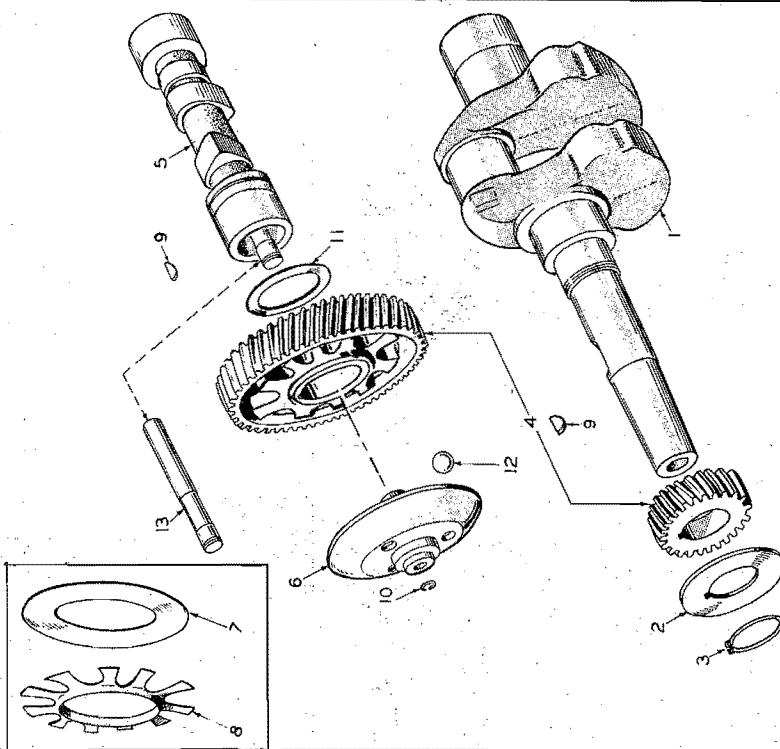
CRANKSHAFT, CAMSHAFT, & GOVERNOR CUP GROUP
